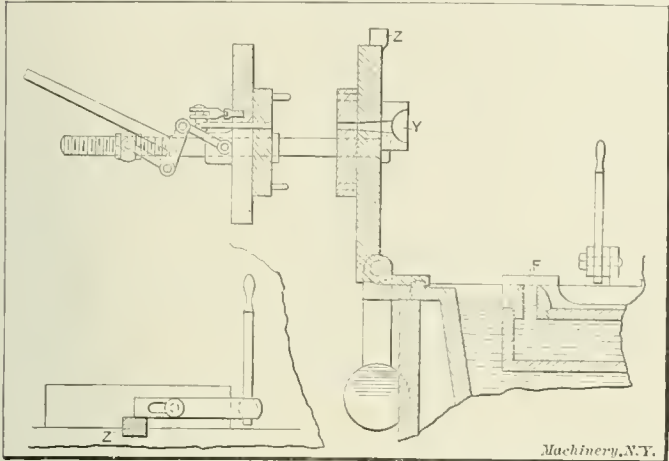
Tilting Mold Table and Method of Parting the Mold
